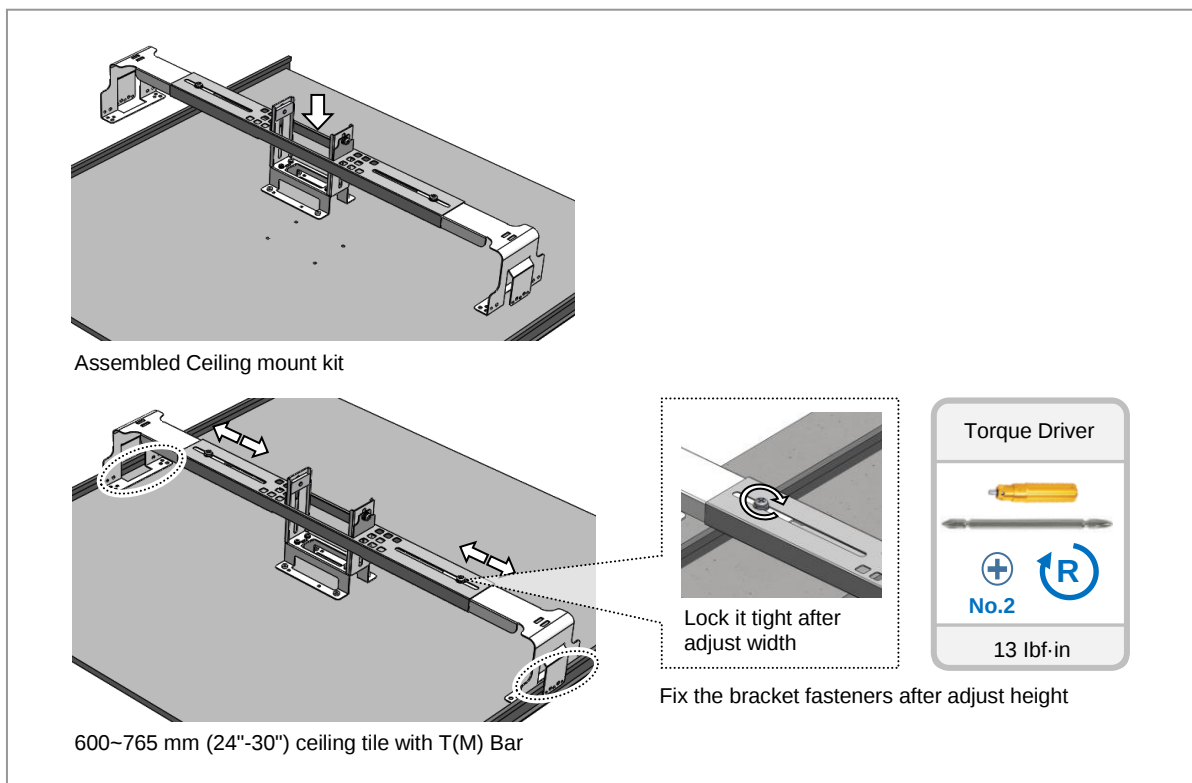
Fixing Fixed Ceiling Mount Bracket Assembly
